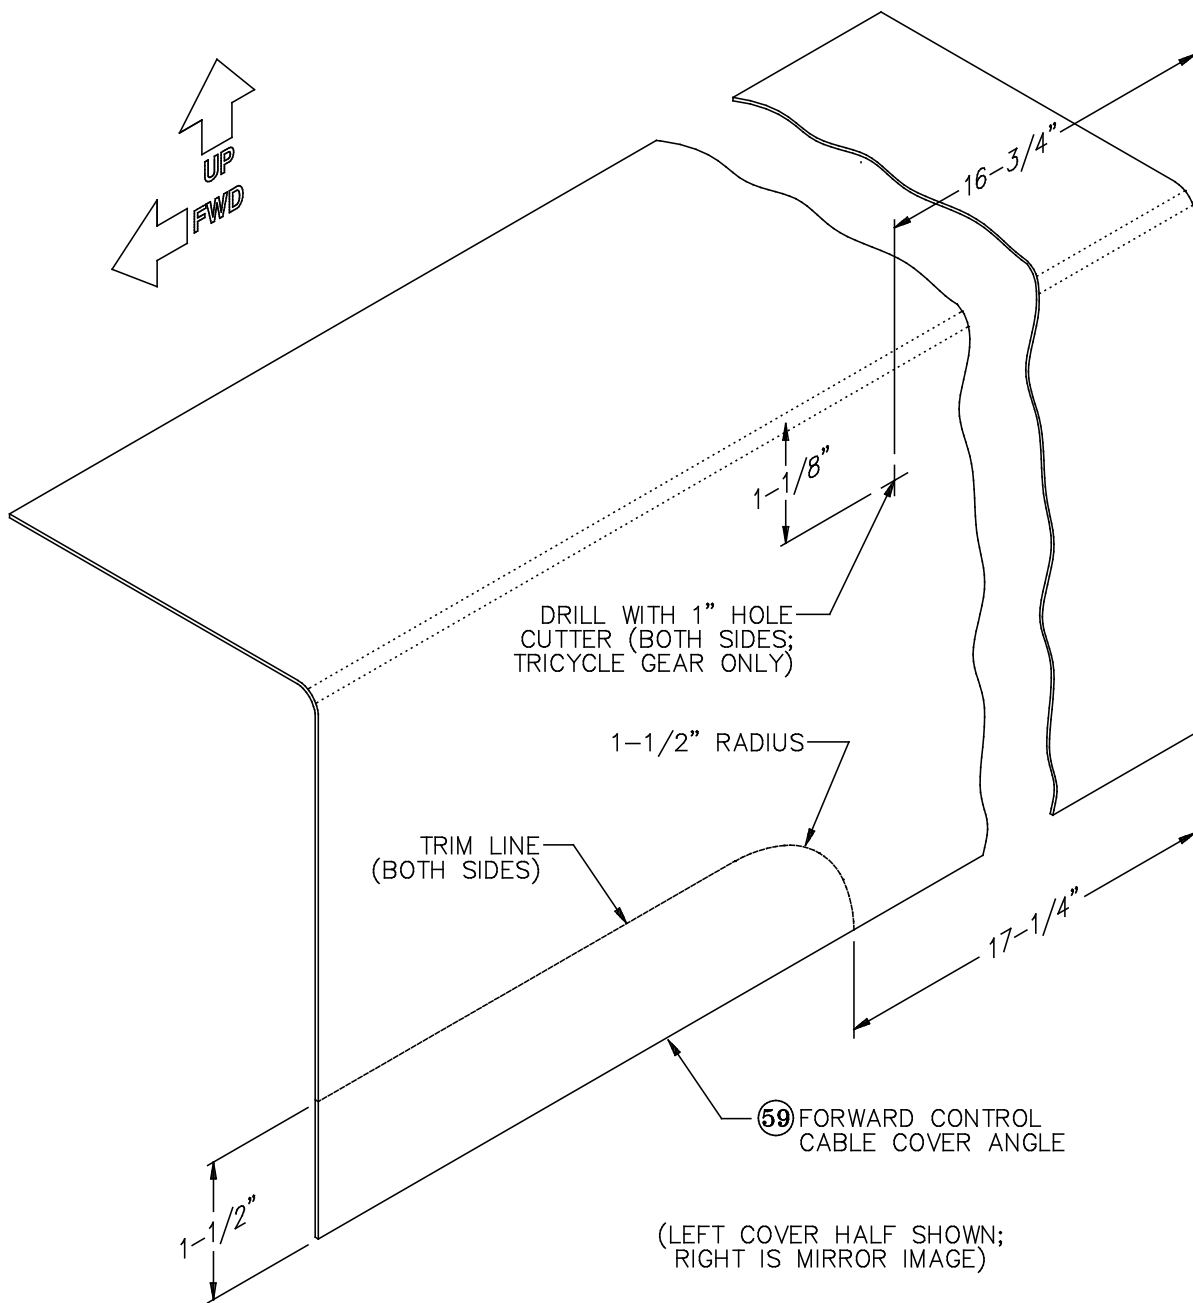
Trimming the Forward Control Cable Cover Halves to Clear the Rudder Control Weldments
